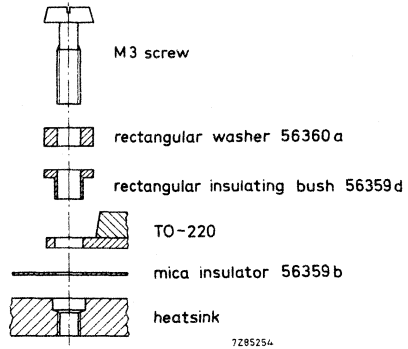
Insulated screw mounting with rectangular washer into tapped heatsink. Known as a "top mounting".
